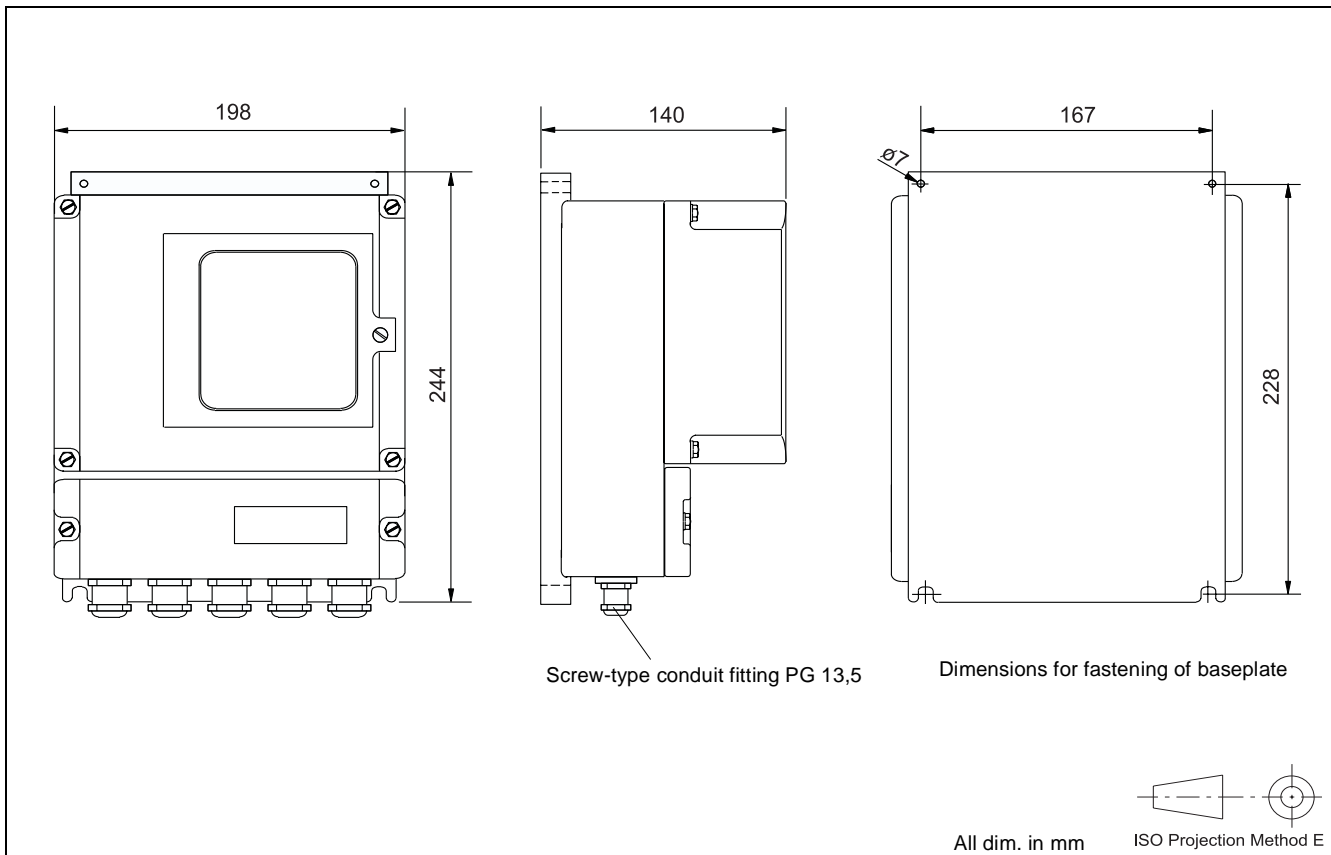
Dimension drawing of field mounted housing for 50VM1000 converter
